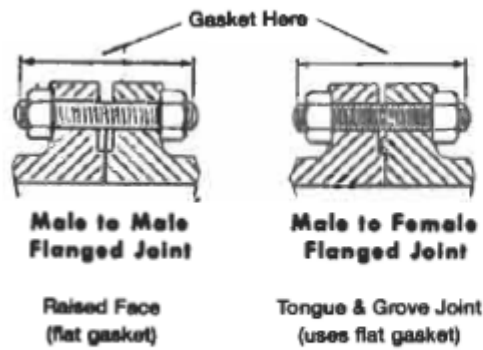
Most common flange connection joints. Cross section of a pair of flanges with bolts to draw joint tight.
